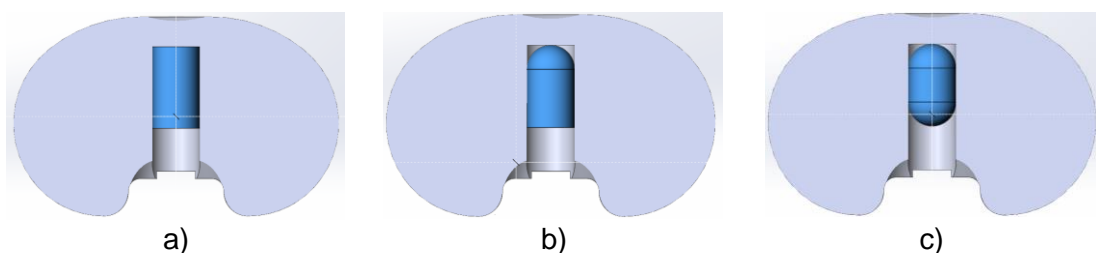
Three capsule designs with a) cylinder, b) bullet, and c) pill shape, and their location within a tibial insert with posteriorly drilled flat end hole.
